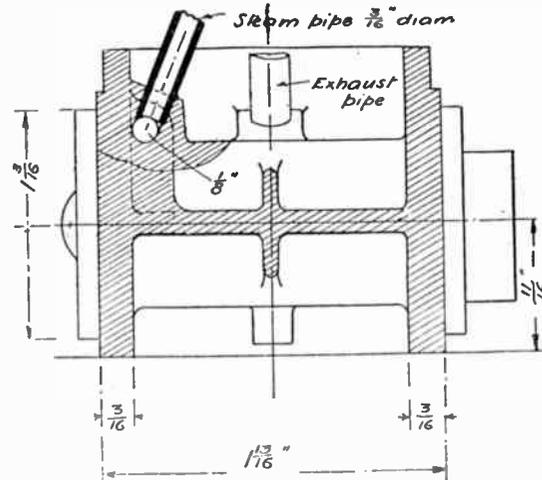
LONGITUDINAL SECTION, SHOWING THE CONNECTING LIVE STEAM PASSAGE.
